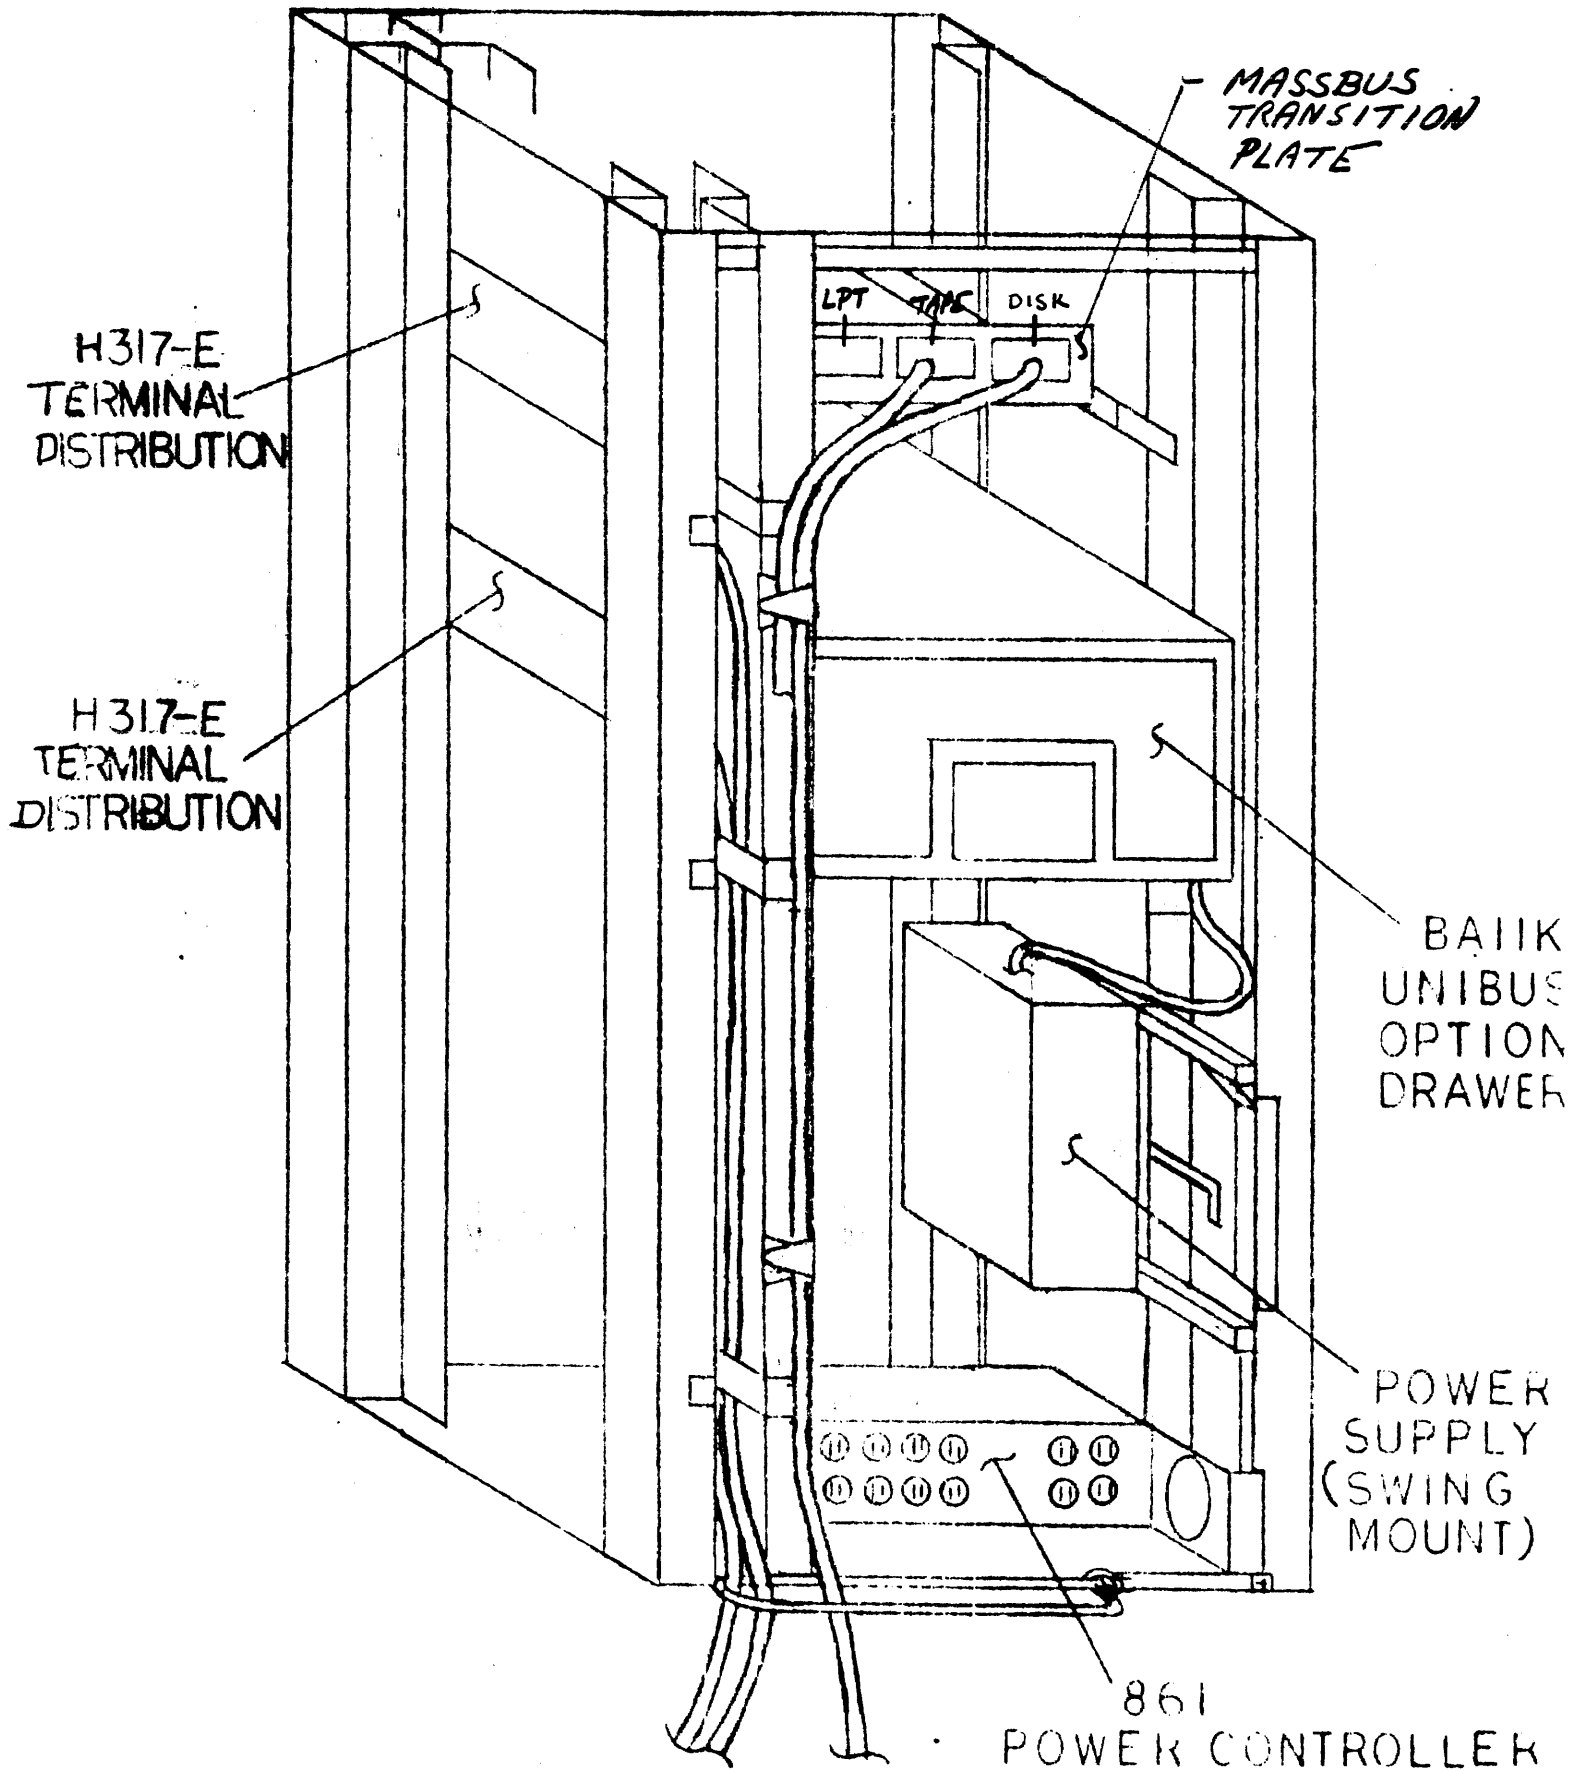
KS10 Cabinet (Rear View - Skins Removed)
